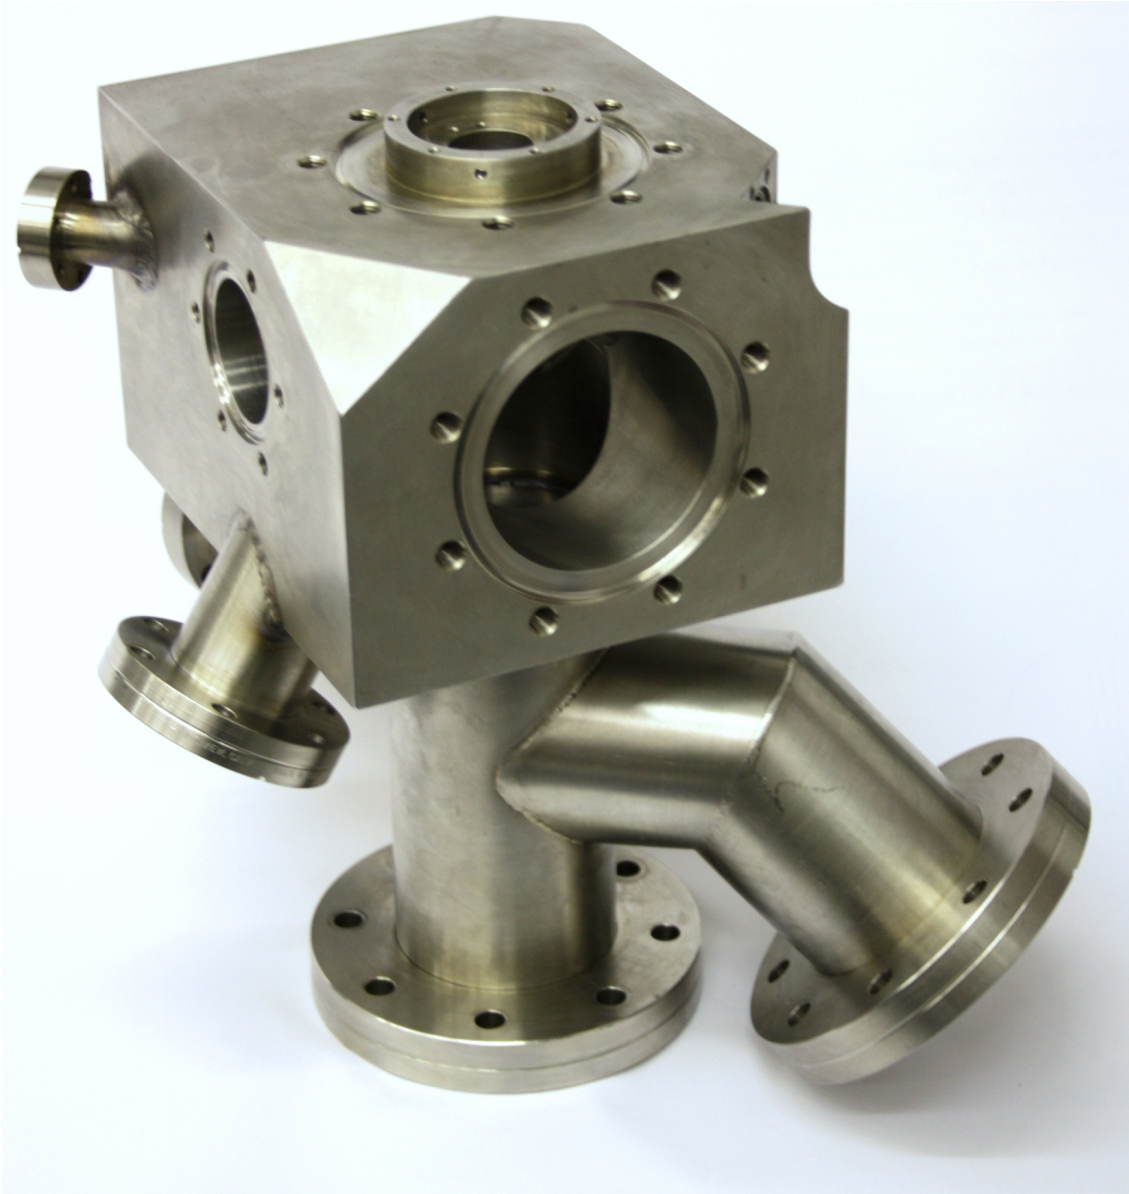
Welded Beam Housing — A photograph of the welded beam housing as described in Figure 2.29 is shown here. This version uses the first revision of the laser port.
